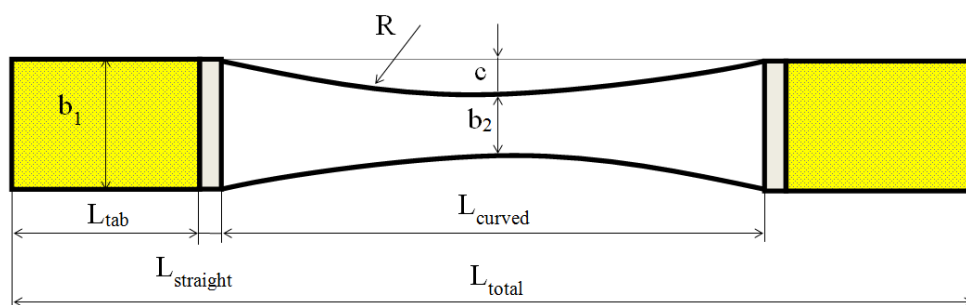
Geometry of a dumbbell-like shape tensile test specimens
